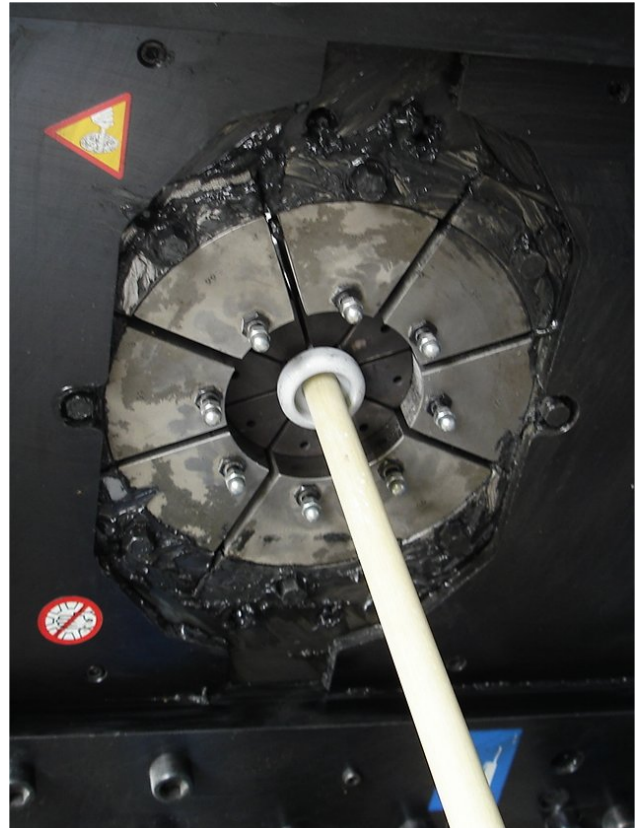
Joining a fitting and a fiber glass rod by a crimping process
